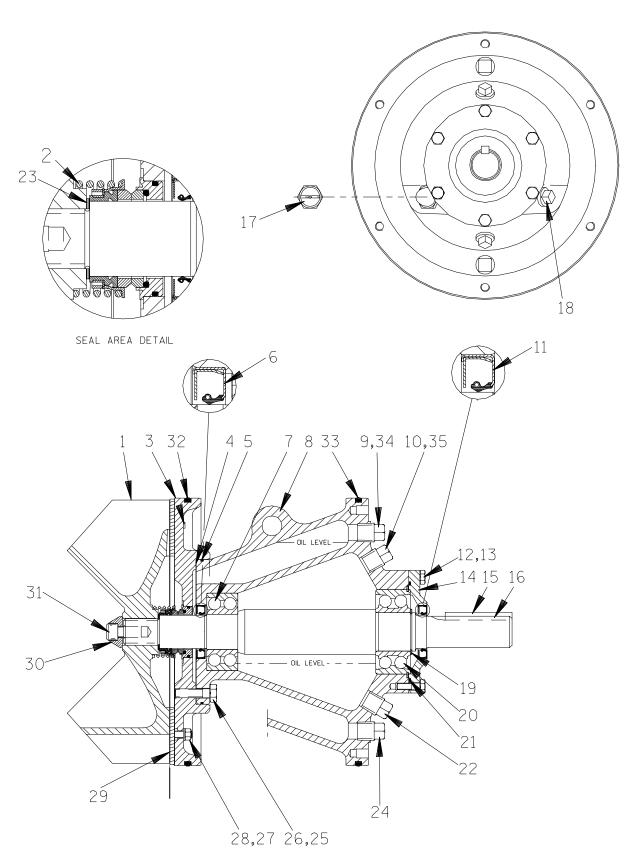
44163-024 And 44163-246 Repair Rotating Assembly
